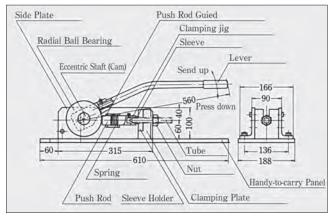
Pre-setting device mechanism Weight: 17kgs.
